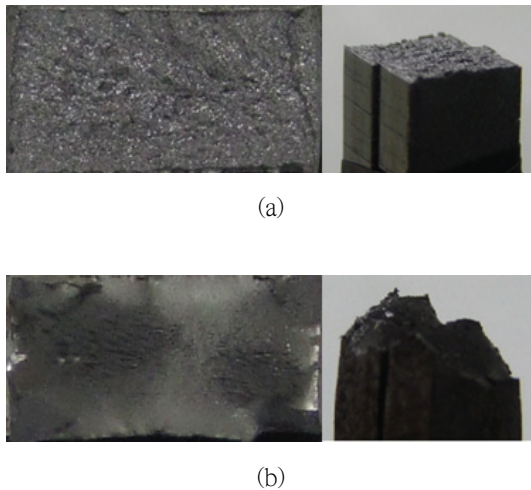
Fracture surface. (a) As-received specimen, (b) 400°C-6h specimen
